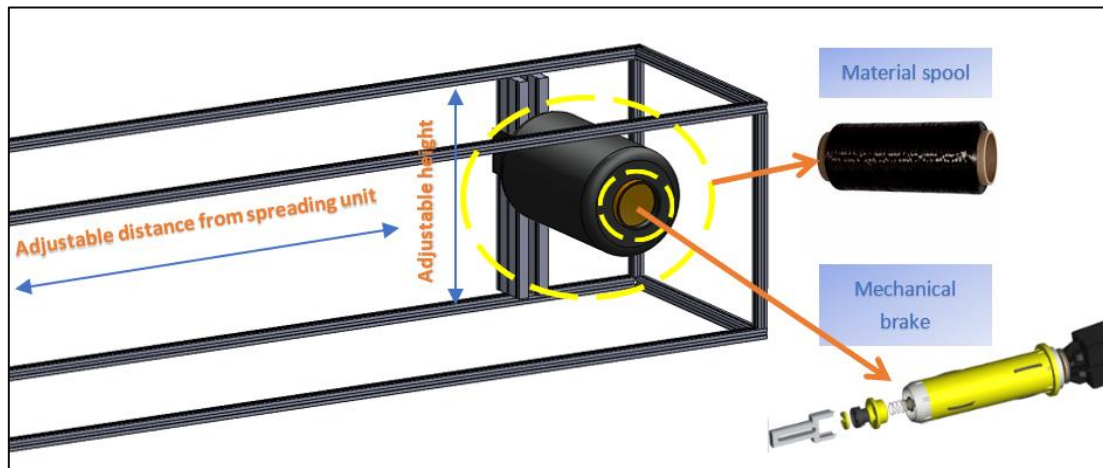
Unwinding unit with mechanical brake [48] and fibre spool
